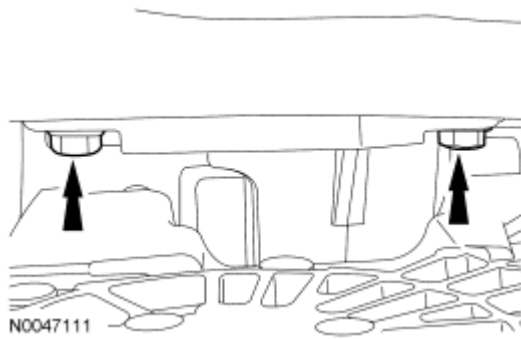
Locating Bolts On Rear Transaxle Insulator
